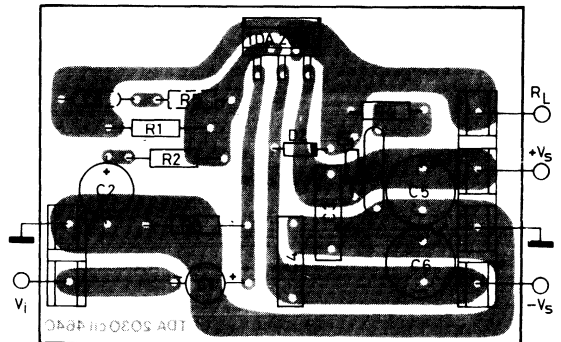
P.C. board and component layout for the circuit of fig. 13 (1:1 scale)
